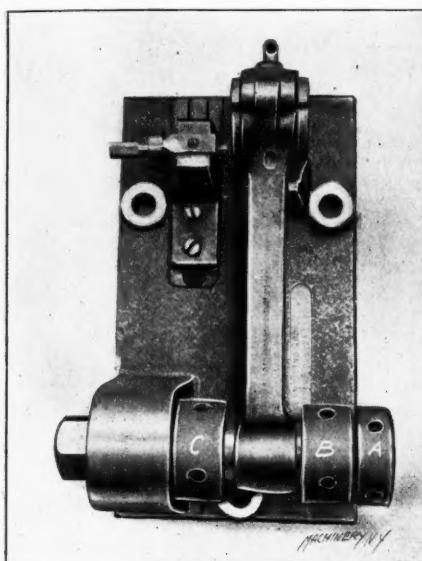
Fixture for Testing the Relative Lateral Positions of Connecting-rod Bearings
